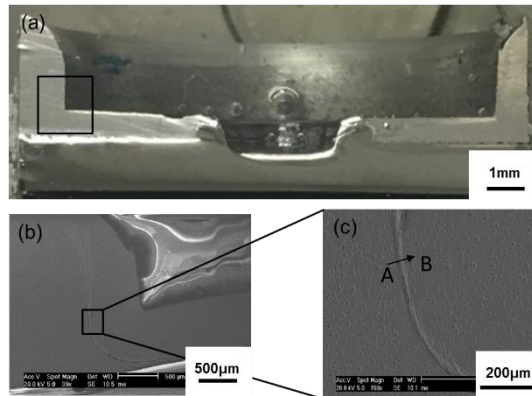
(a) General cross section view of the welding region (b) Enlarged cross section view of the sample (c) EDS line test from point A to B
